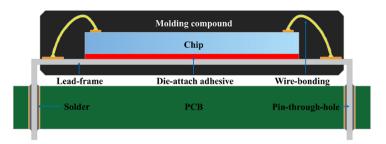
A DIP component assembled on the PCB with PTH system-level packaging.
